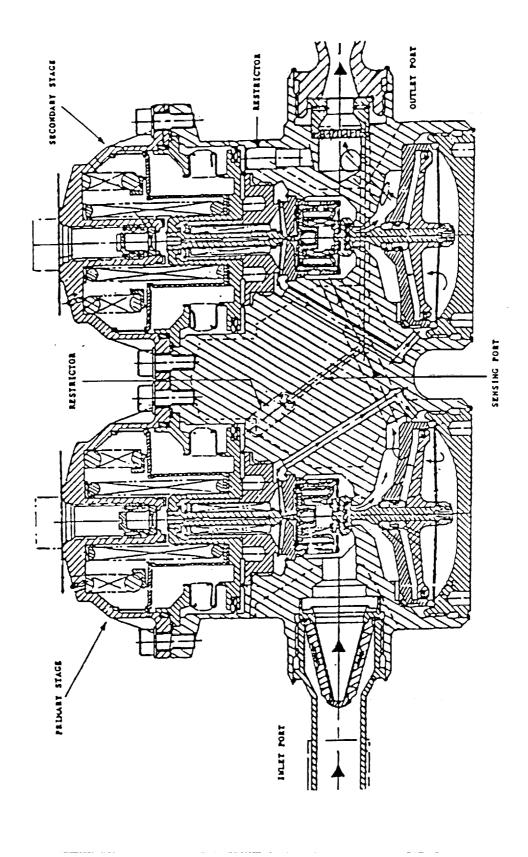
HELIUM PRESSURE REGULATOR ASSEMBLY
